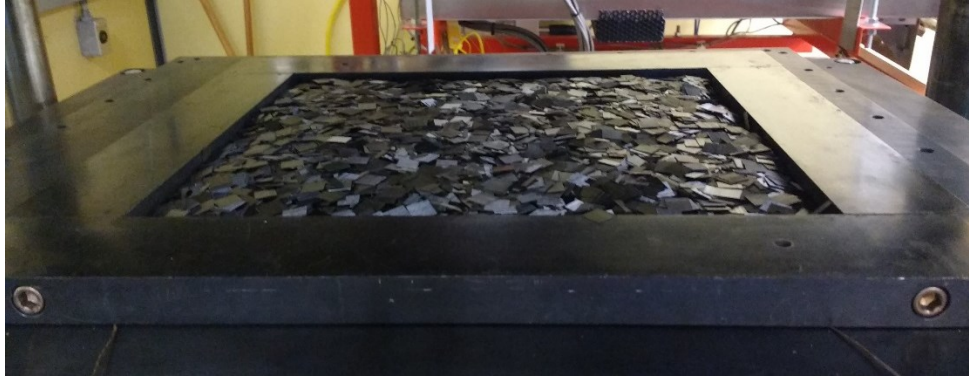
Wabash hydraulic press with DLF material distributed in 304.8 mm x 355.6 mm picture-frame mould.
